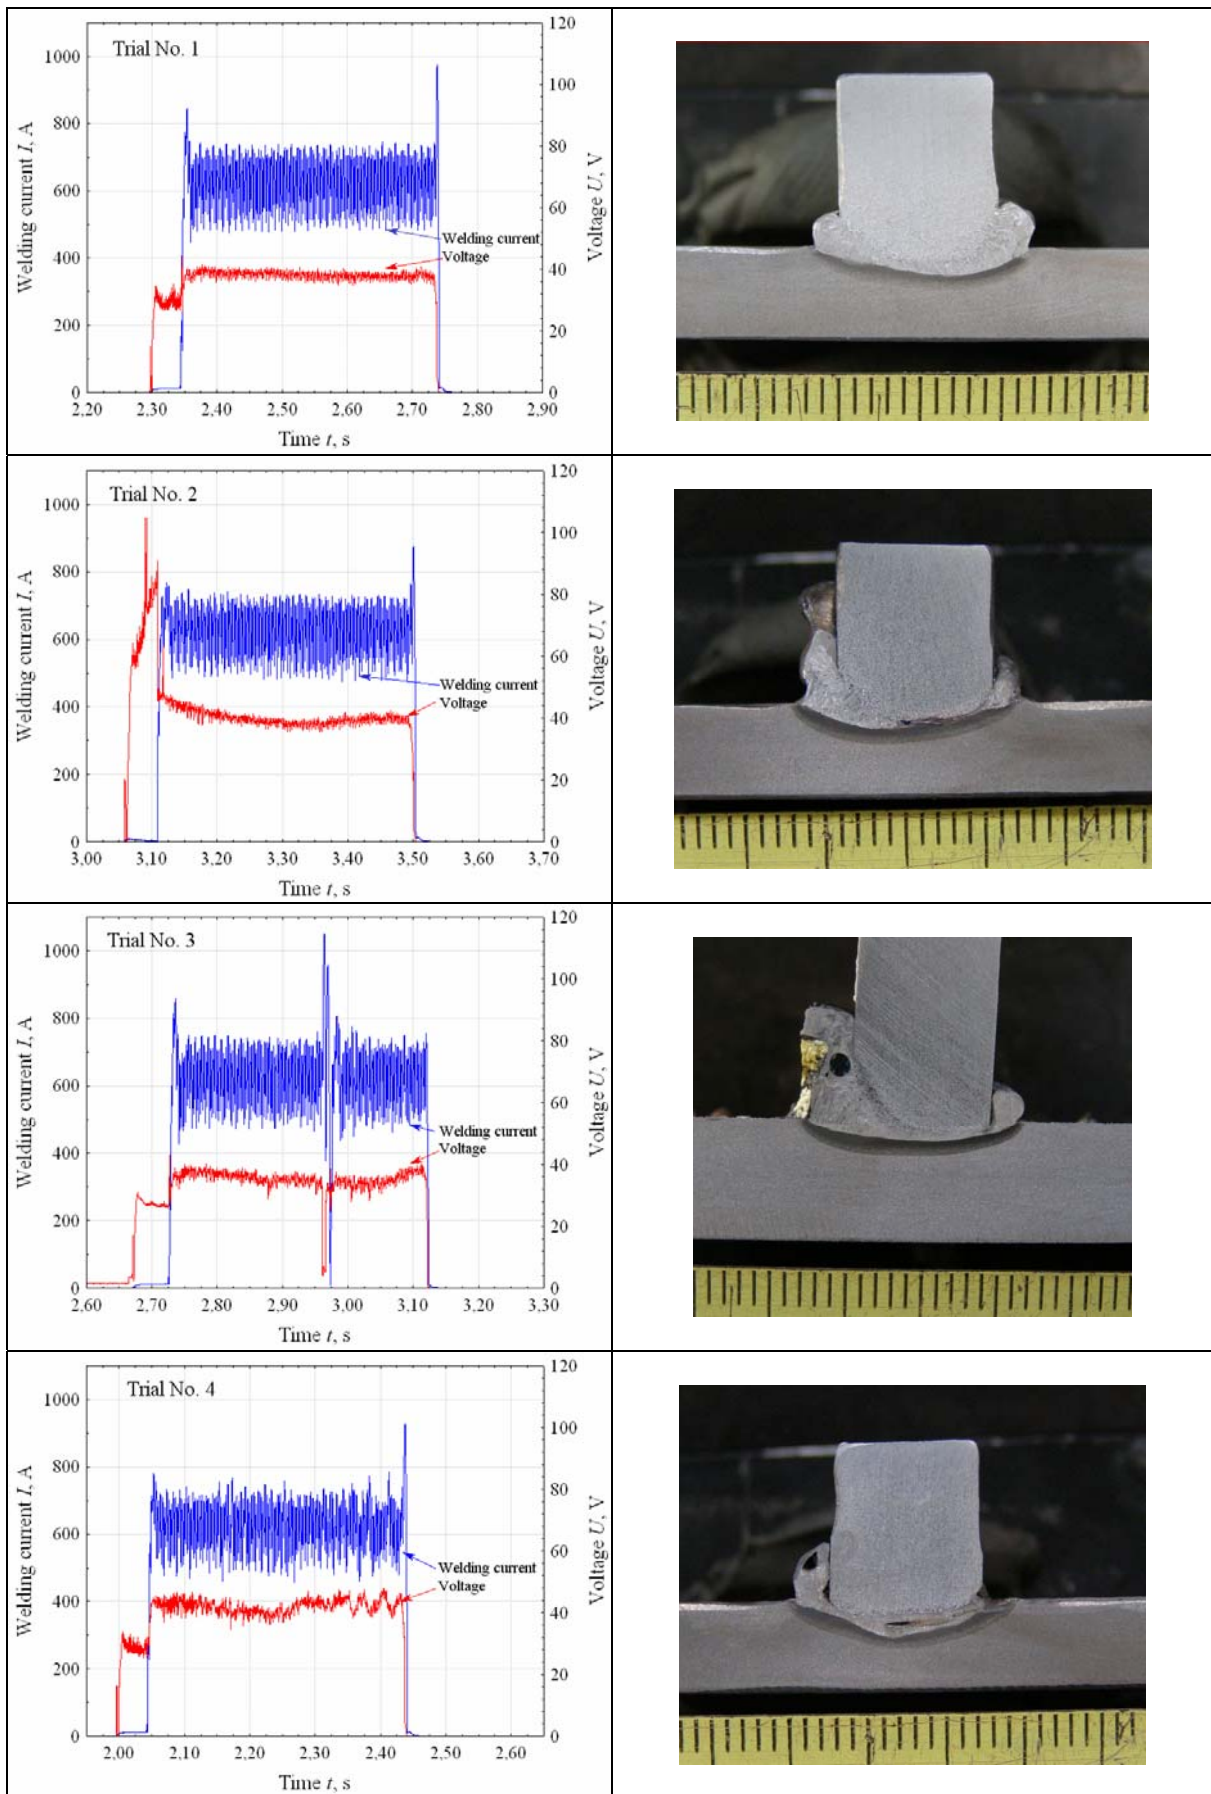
Welding current and voltage distribution during complete cycle of stud welding process and macro section of related weld joints.
